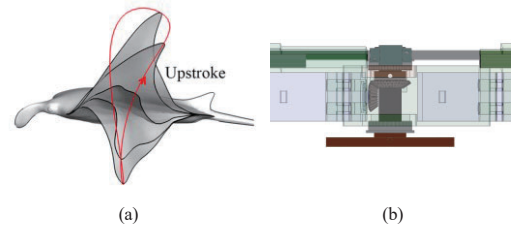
(a) Lateral view of the tip trajectory [6]; (b) Demonstration of the bevel gear mechanism.
